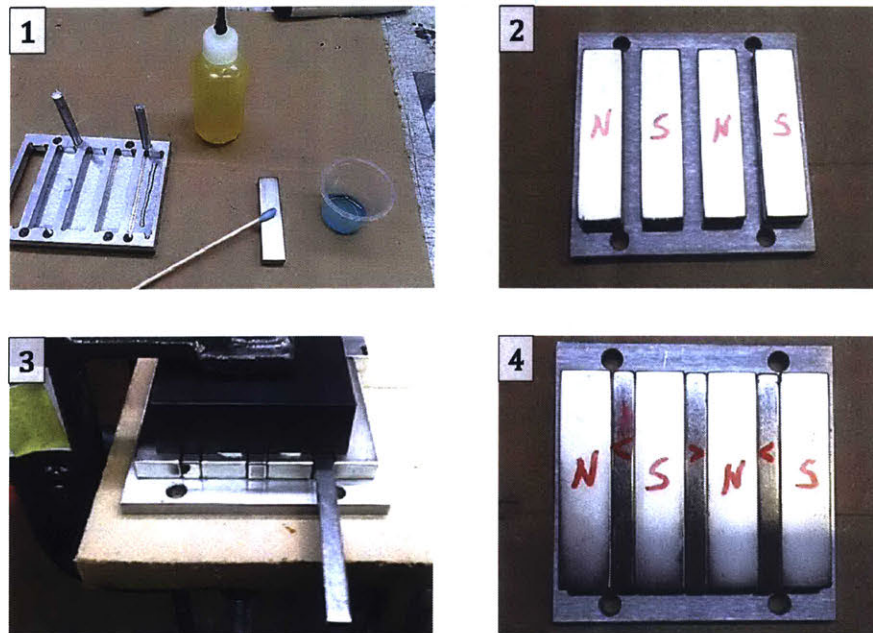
Assembly process of Halbach magnet array. Photos courtesy of Fred Sommerhalter.
